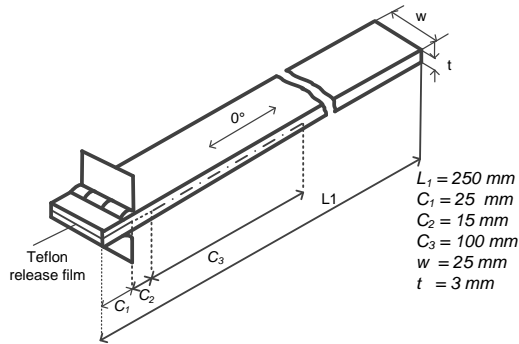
Schematic illustration of DCB specimens for G_{IC} test
